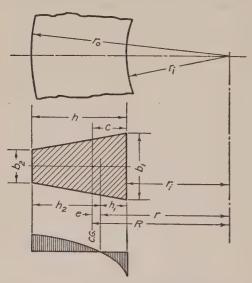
TRAPEZOIDAL CROSS-SECTION OF A HOOK.
